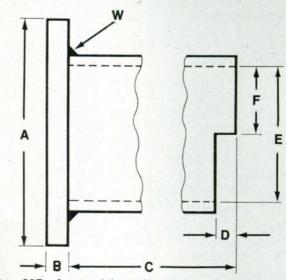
A special tool can be fabricated using dimensions shown for use in loosening rear wheel wedges. Tool should be made from 1/2 inch (13 mm) steel plate and 1/4 inch (6 mm) wall thickness steel tubing.
